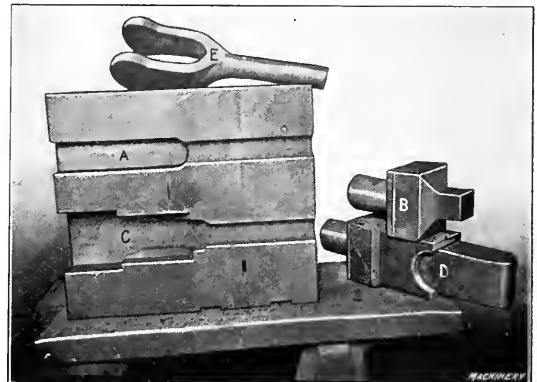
Dies and Tools for making Fork End of Main Driver-brake Pull Rod shown at D in Fig. 70 in a Forging Machine
